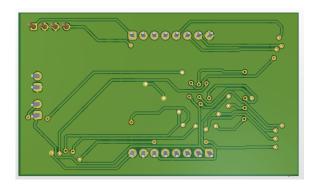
3D2 PCB 3: Main Gauntlet Board
